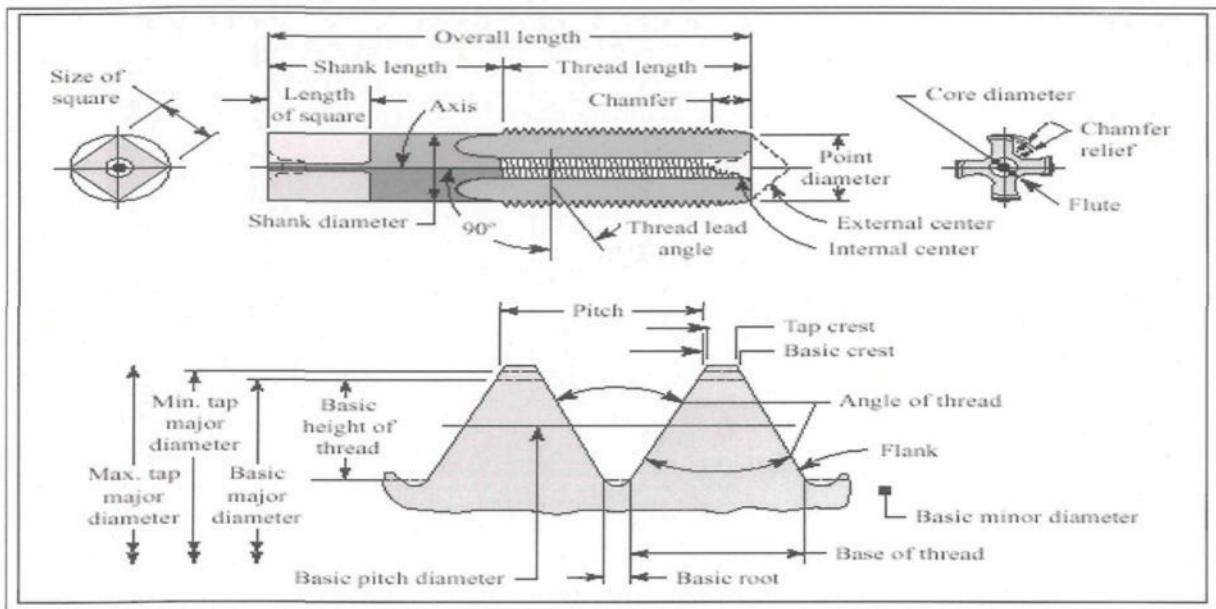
Tap and Thread Nomenclature.¹²⁰
